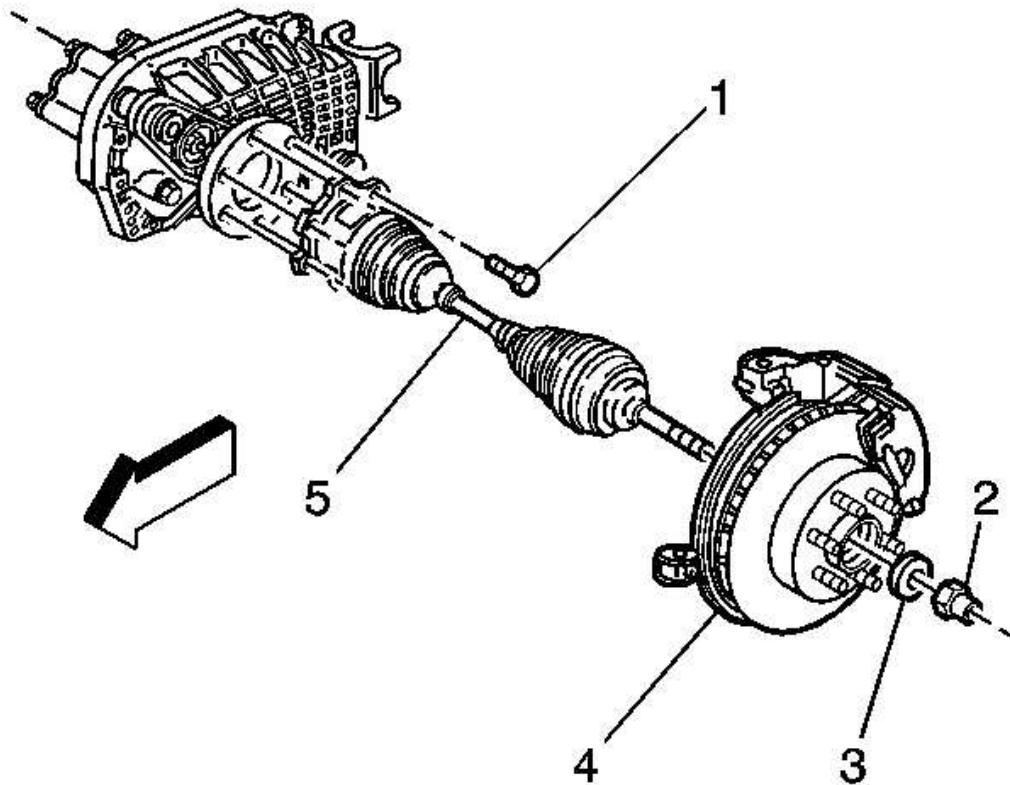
Removing Wheel Driveshaft Assembly Retaining Nut And Washer (4WD)
